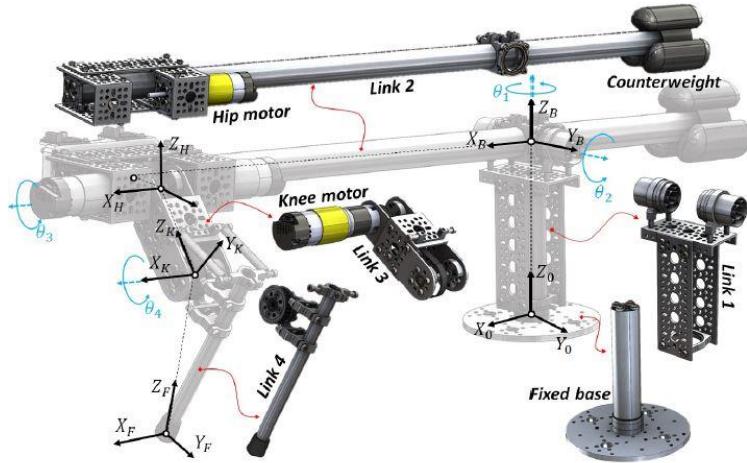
CAD model & exploded view of HOPPY assembly [3]
